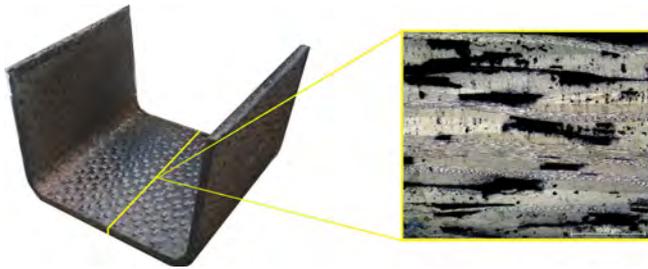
Composite test specimen without resin injection, displayed with the cut through surface.
